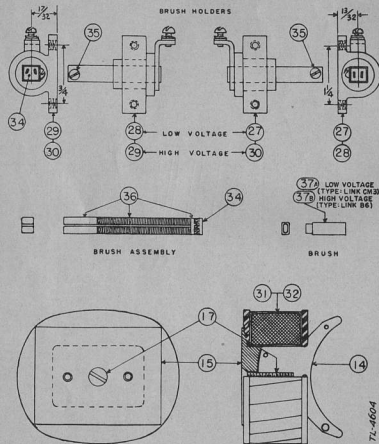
Generator GN-44-A, field coil and brush assemblies.
